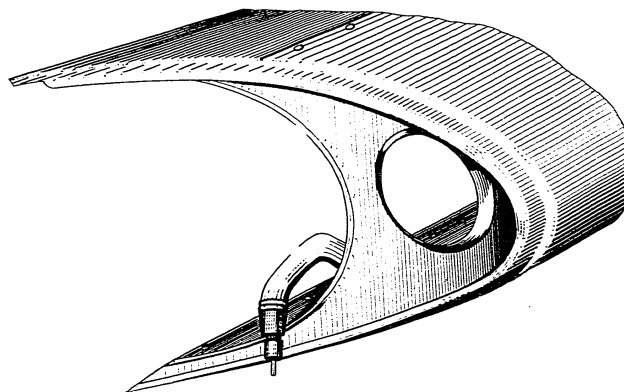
BLADE SECTION LEADING EDGE WITH ELECTRICAL JUMPER FOR CONNECTION OF HEATING ELEMENTS.
